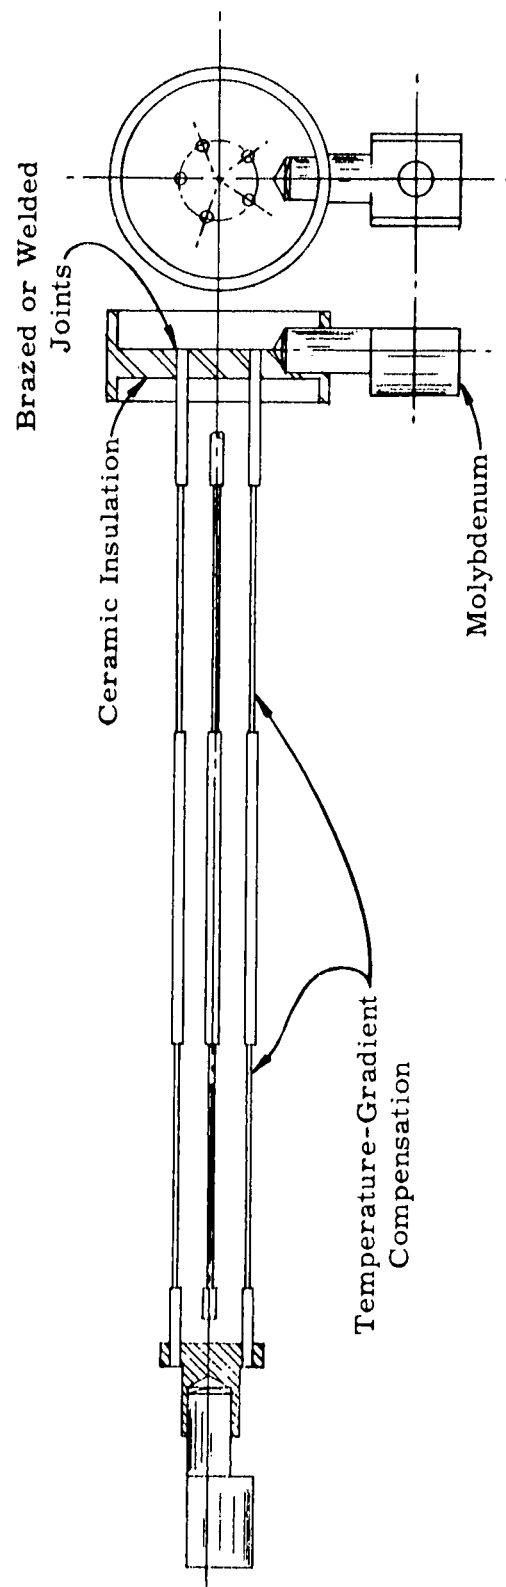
HEATER DESIGN - WELDED ASSEMBLY
